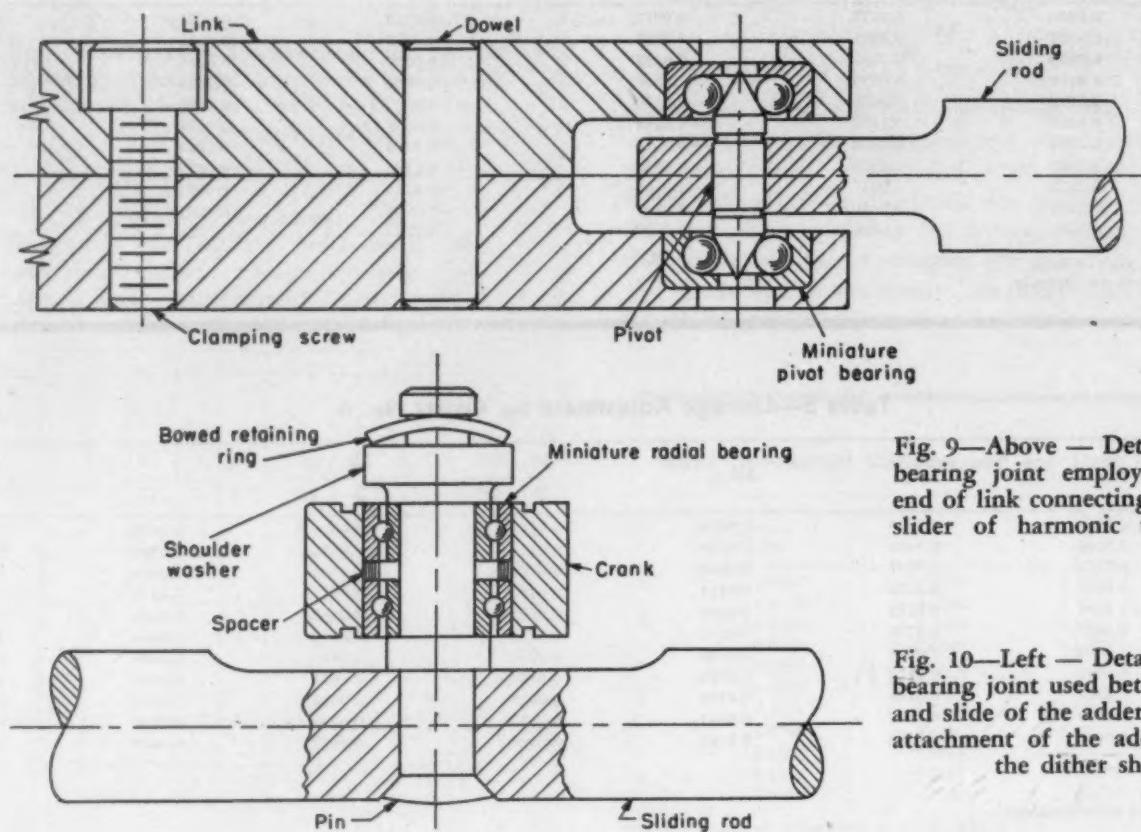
Above — Detail of pivot bearing joint employed at each end of link connecting crank and slider of harmonic transformer
